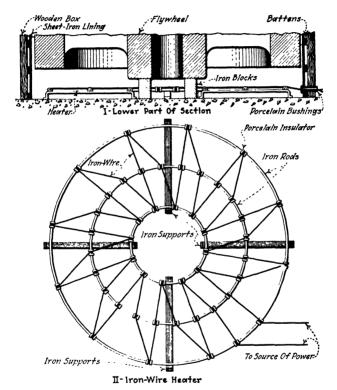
Arrangement of the flywheel support and iron wire heater in the oven for heating the flywheel.
